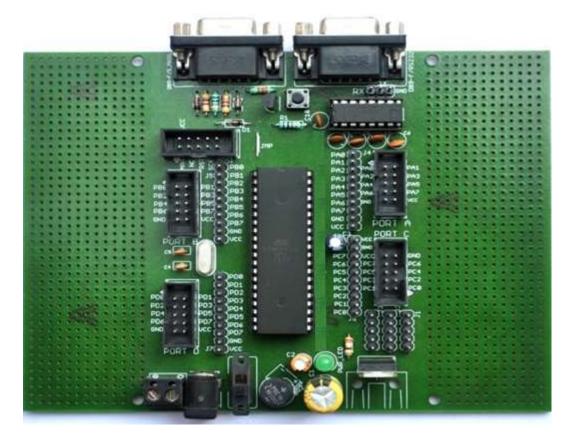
Main board PCB layout with mounted components for ATmega8535/16/32
